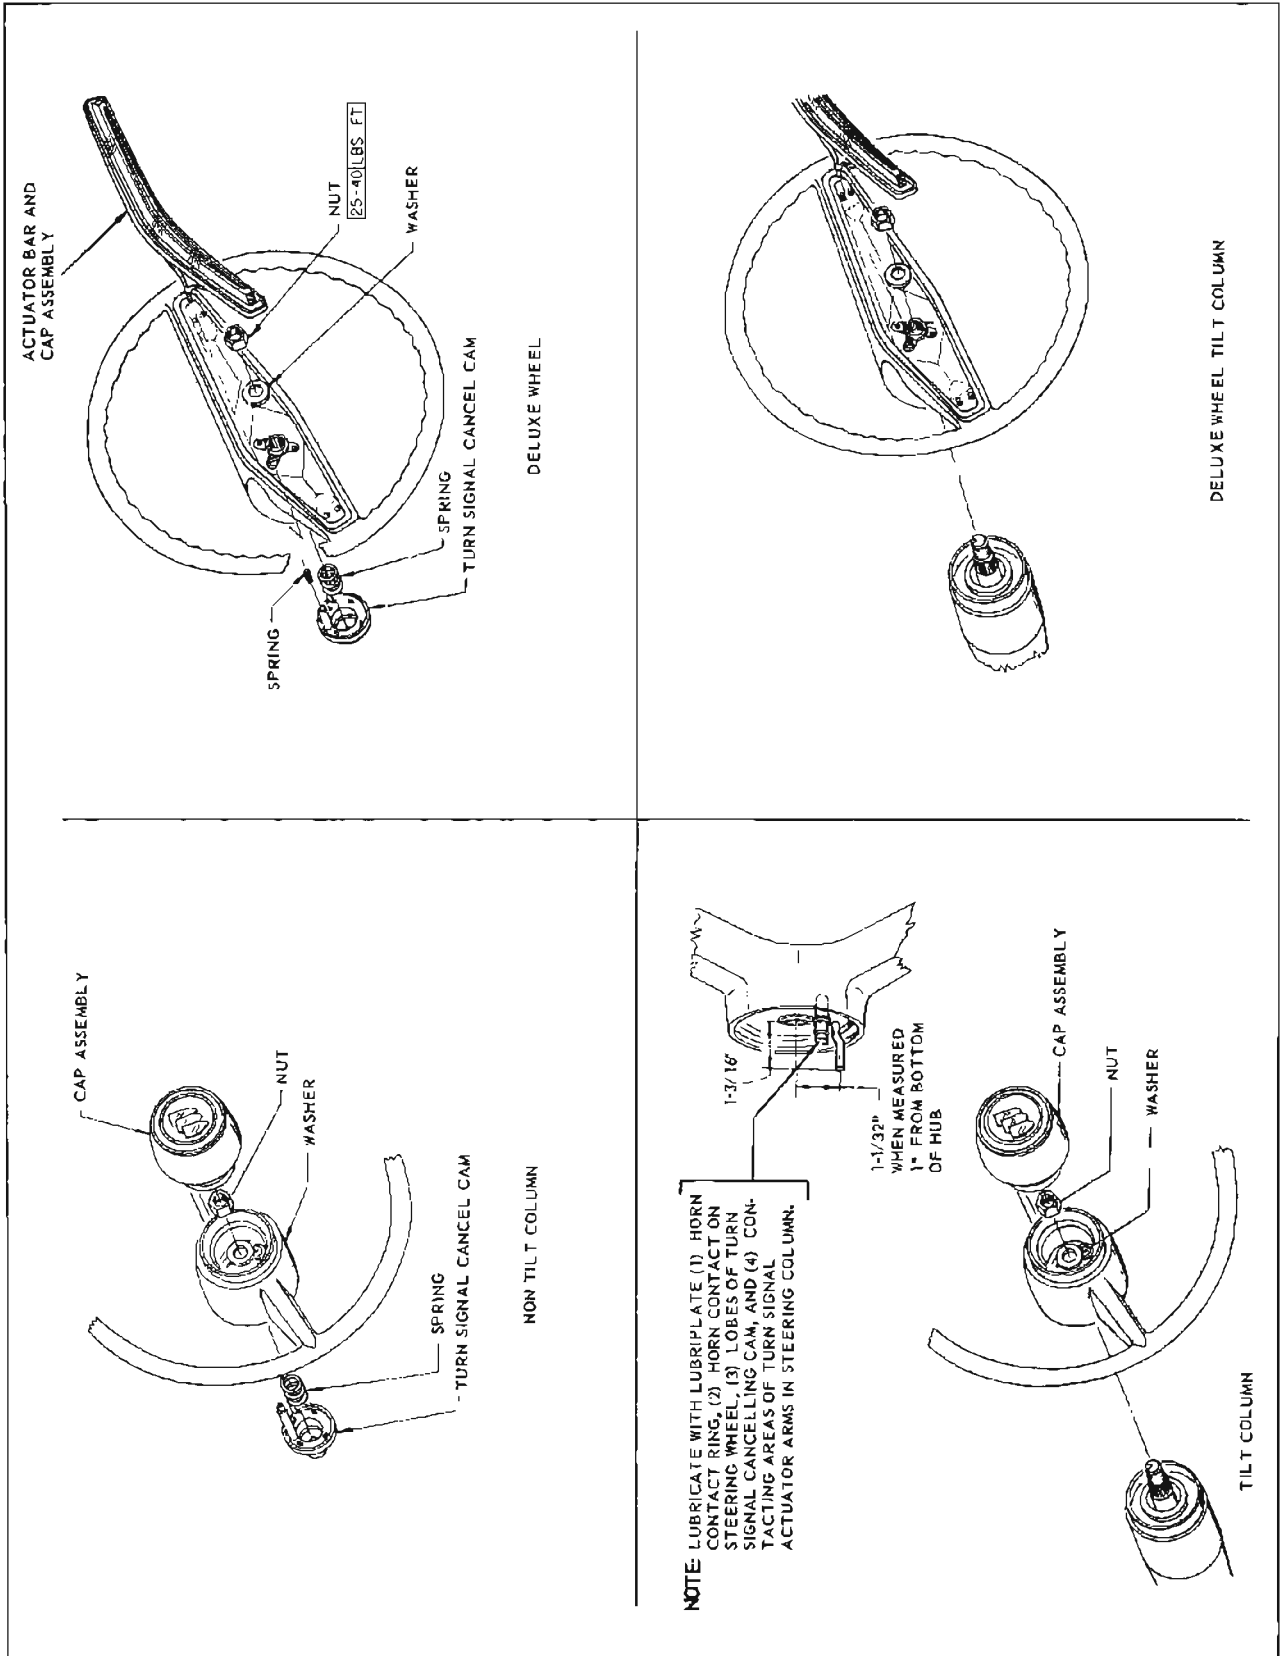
Deluxe and Standard Steering Wheel Installation
